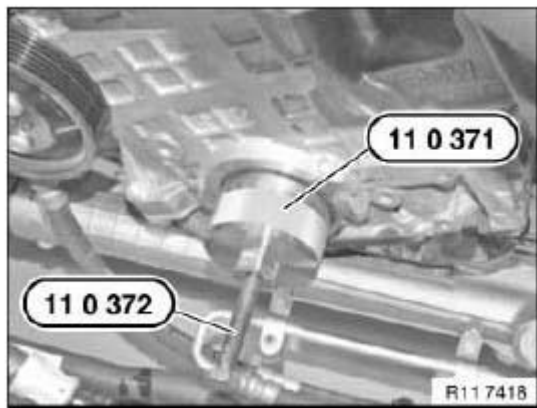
Identifying Special Tool (11 0 372 And 11 0 371)
